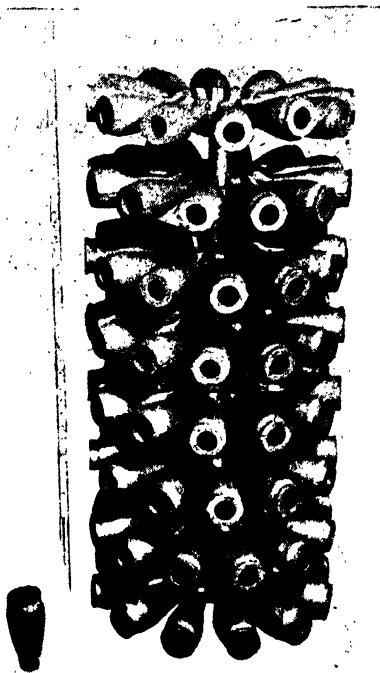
Centrifugal steel castings, pressure type. (Courtesy of Duncan Foundry and Machine Works.)
